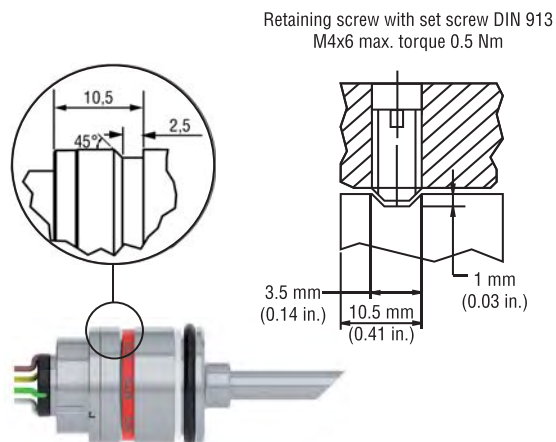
Model MS installation in magnetic material using a non-ferrous magnet spacer.
